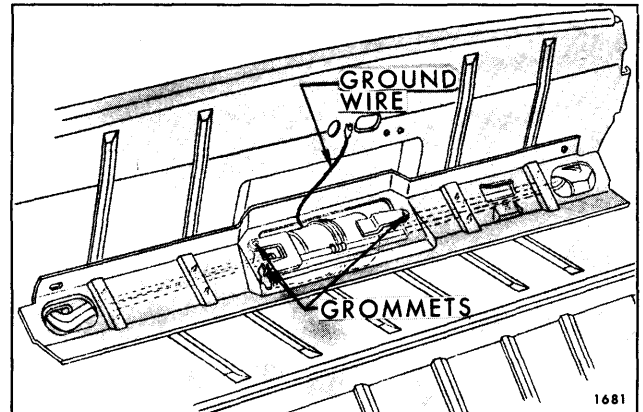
Motor and Pump Installation "B, C & F" Styles
